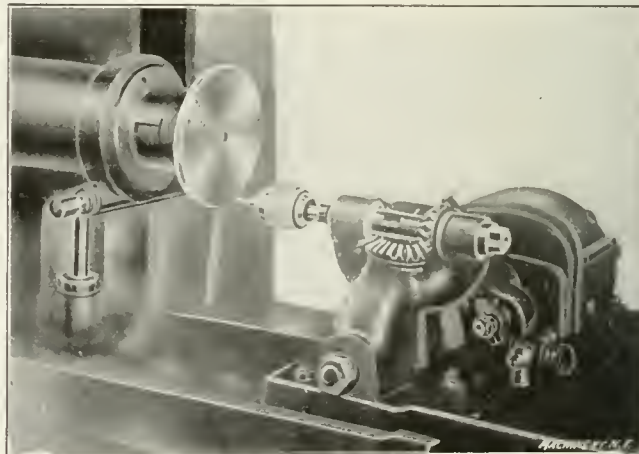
Device for Drilling Index Plates in a Brown & Sharpe Automatic Gear-cutter
